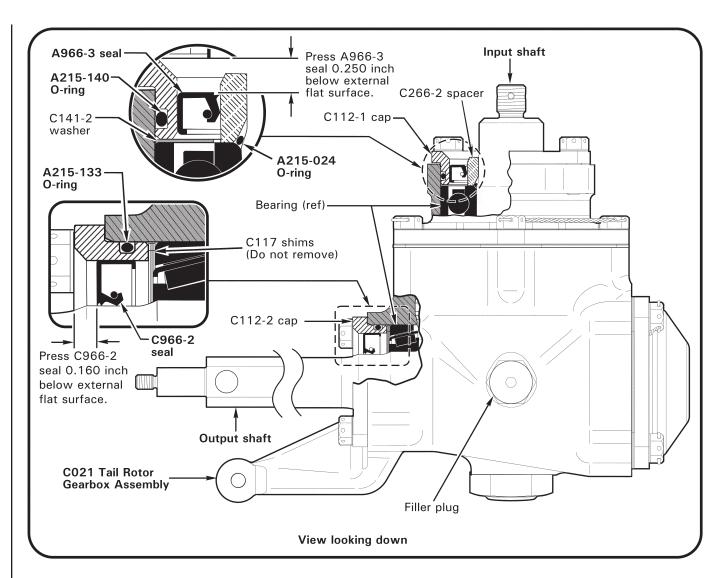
SHAFT SEAL REPLACEMENT
